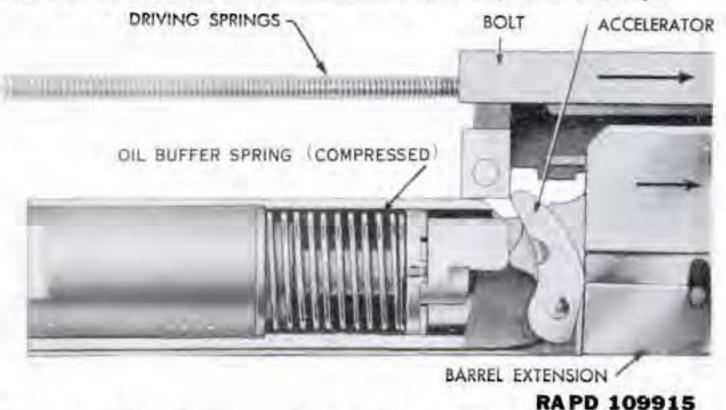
Bolt unlocking accelerator to release compressed oil buffer spring.
